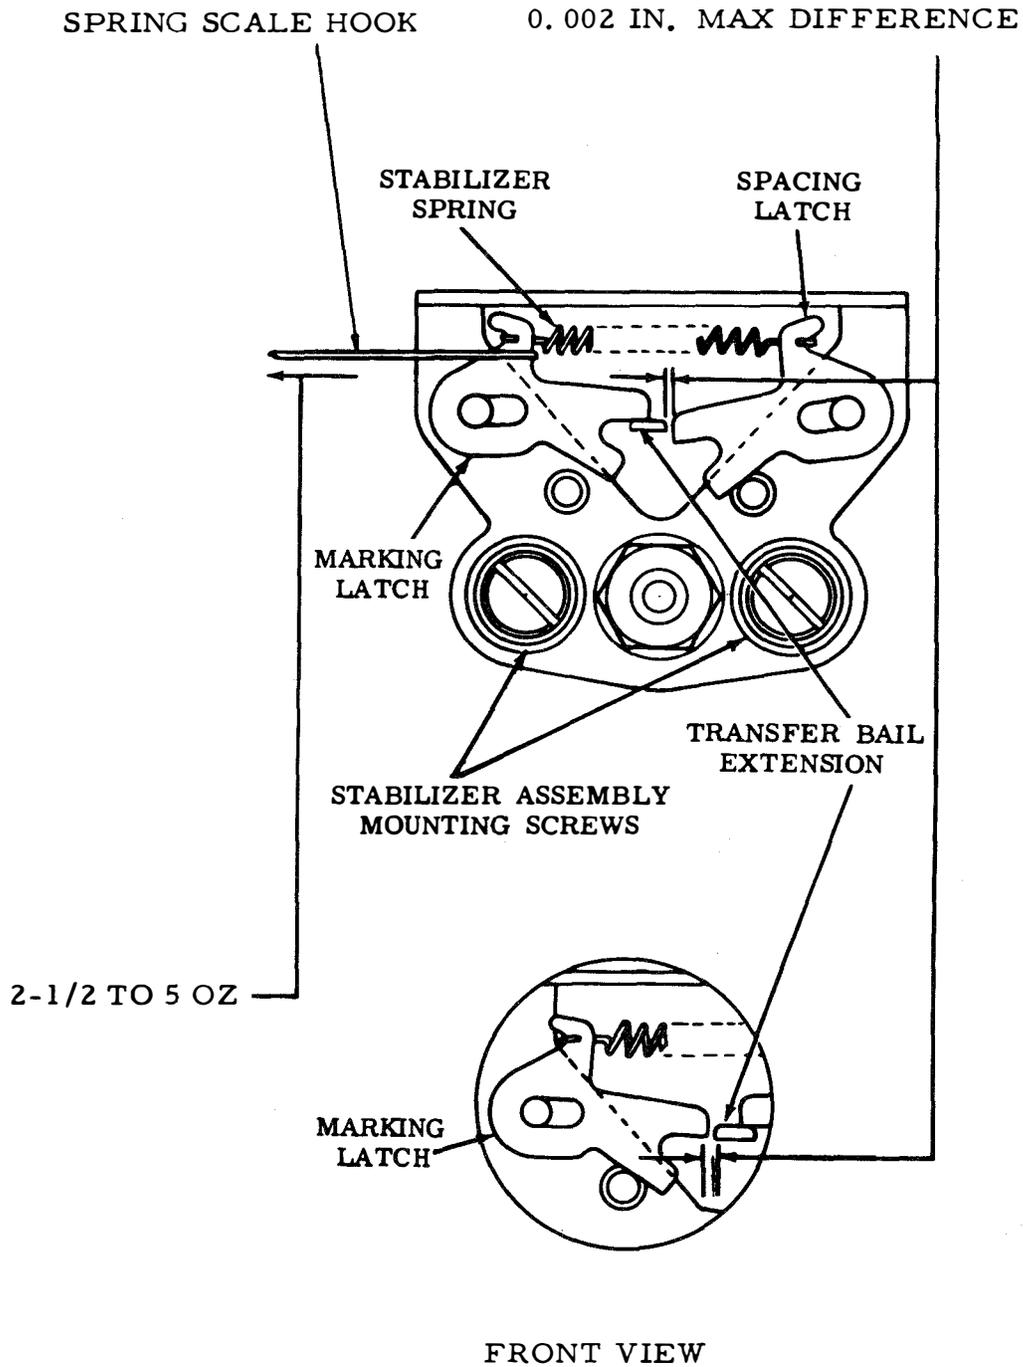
Transfer Bail Stabilizer and Stabilizer Spring
